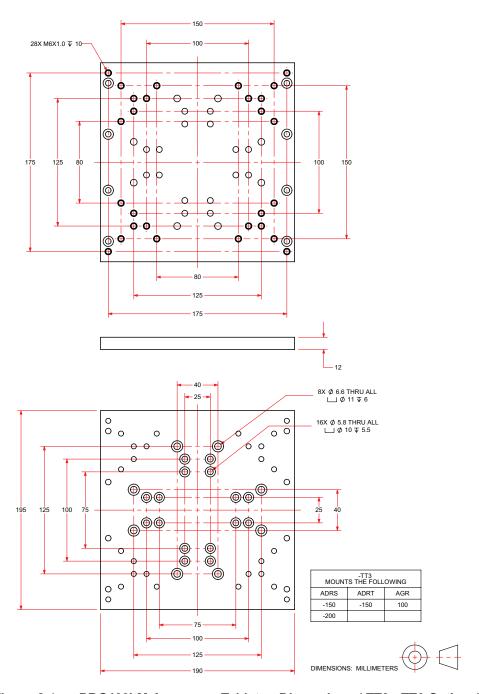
PRO190LM Accessory Tabletop Dimensions (-TT3, -TT6 Options)
